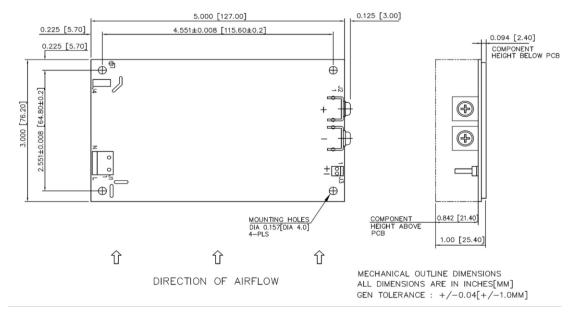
Mechanical Drawing - Screw Terminal (Option 1)
